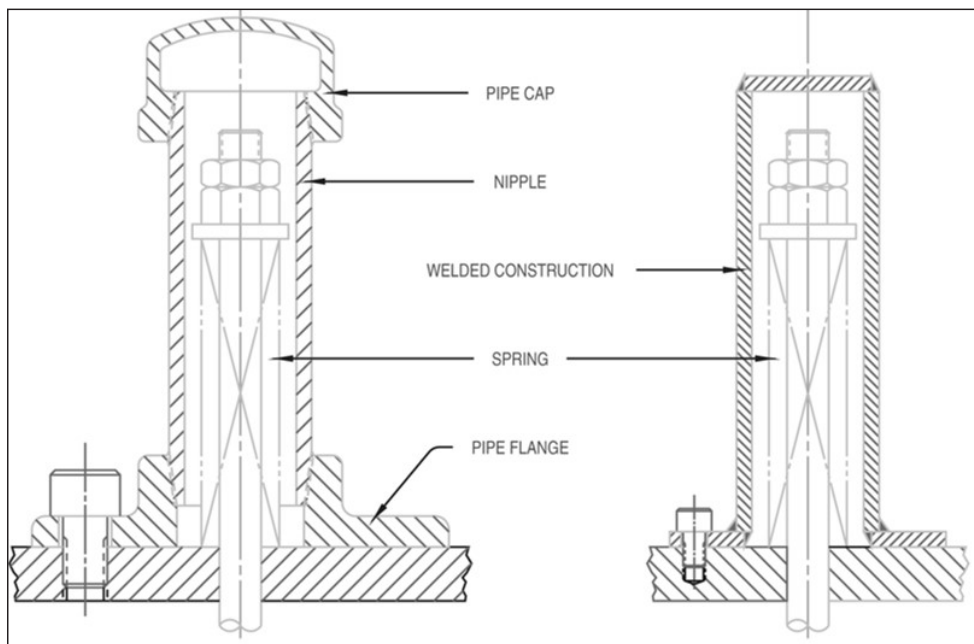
(b) - Springs for core return mechanisms can be guarded with standard pipe fittings, (left), or with welded covers, (right)
